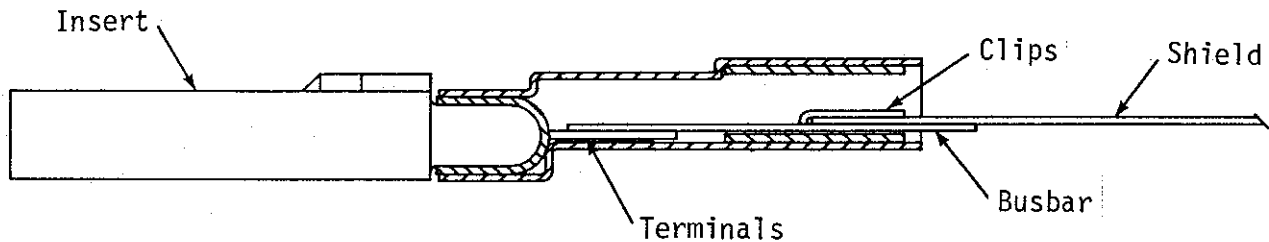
Shield/Busbar Assembly Inserted into Insert Boot Per Note "A"
